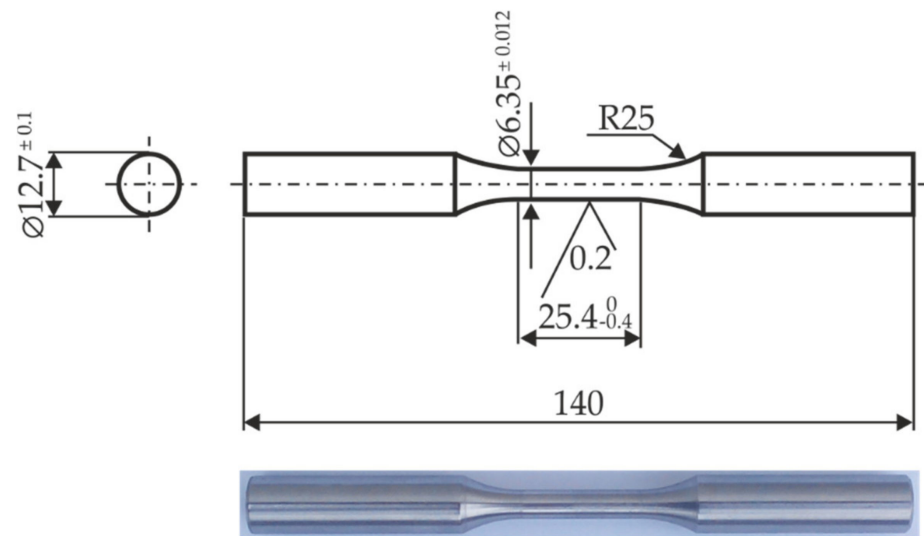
Technical drawing of fatigue testing specimen and real specimen (unit: mm).
